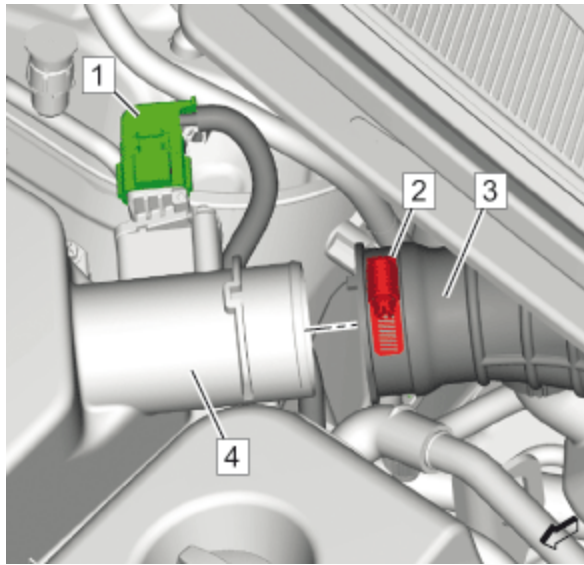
Air Cleaner Outlet Duct, Air Cleaner Assembly, Clamp And Electrical Connector
